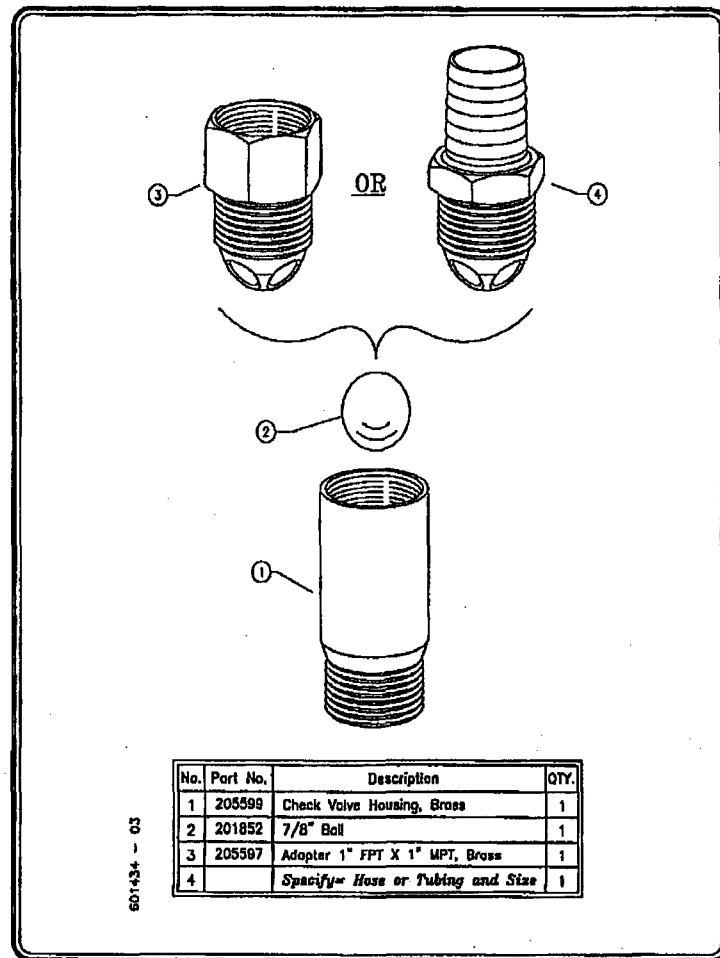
Exploded View of 1-Inch Brass Check Valve
